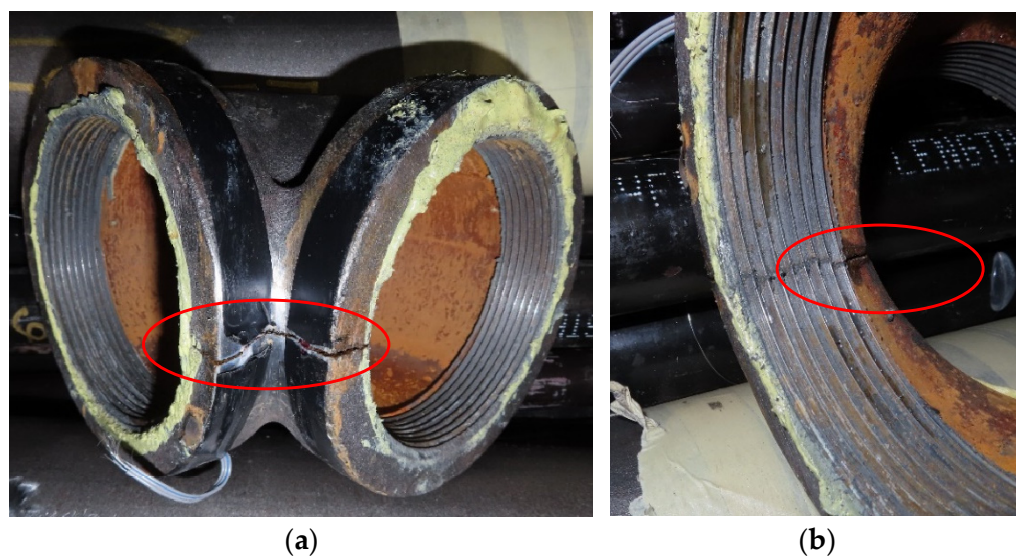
Post Disassembly Elbow Fitting Fracture Images: (a) Fitting Rupture Along Casting Line; (b) Threads of the Fitting Post Rupture.
